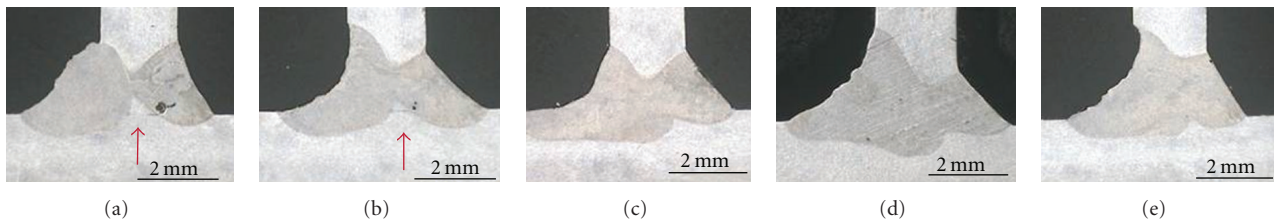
Macrographs of the weld seams obtained using different laser power of CO_2 laser (fixed welding parameter: $v = 4 \text{ m/min}$). (a) 6.8 KW, (b) 7.2 KW, (c) 7.5 KW, (d) 7.8 KW, and (e) 8.0 KW.
